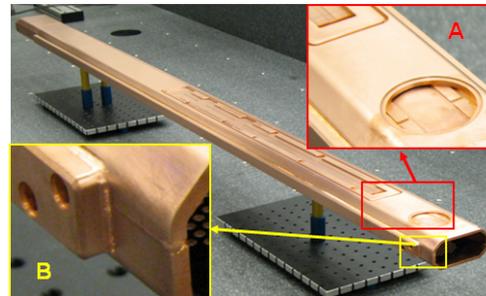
Beampipe after EB-welding (insert B). The ‘duck-under’ channel is visible in insert A.
